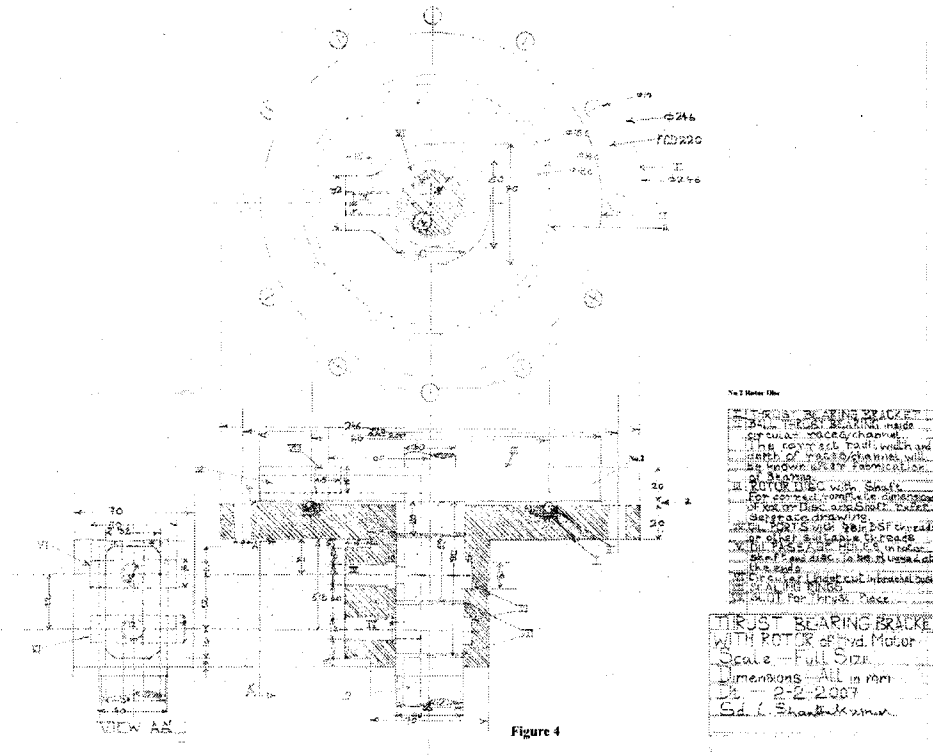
Thrust bearing bracket with rotor of Hydraulic Motor
